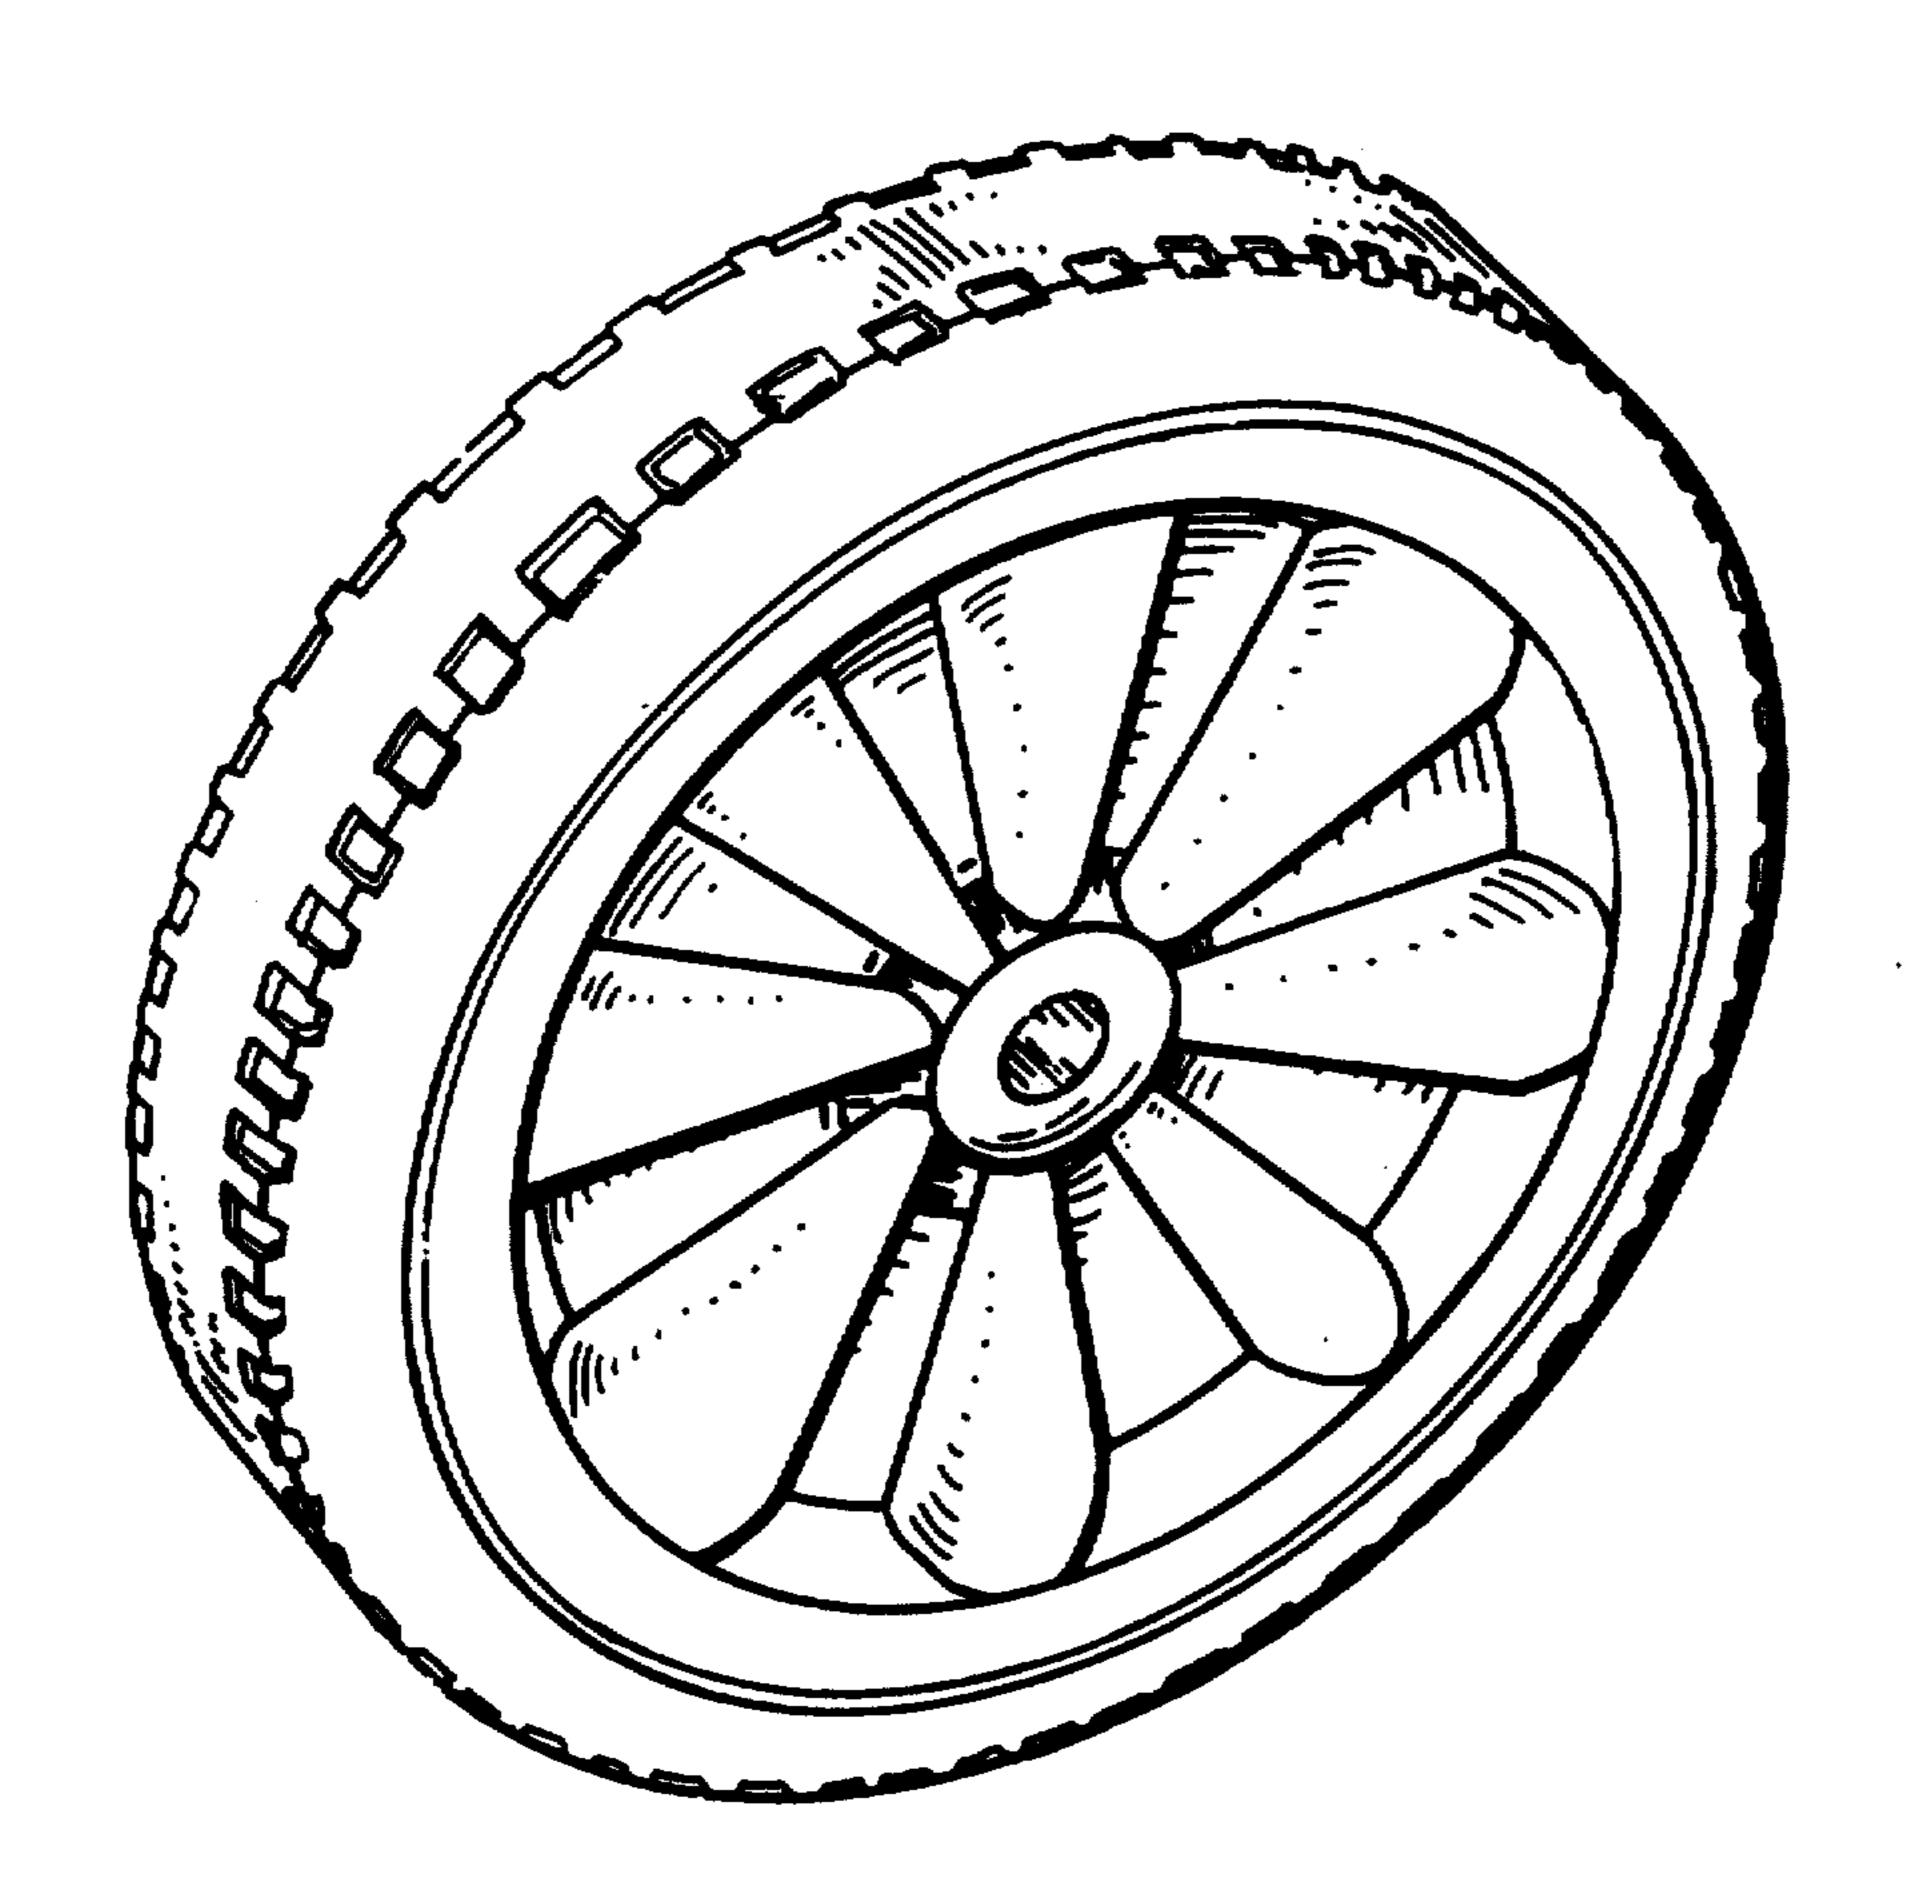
is an isometric view of a blow molded wheel showing my new design;
